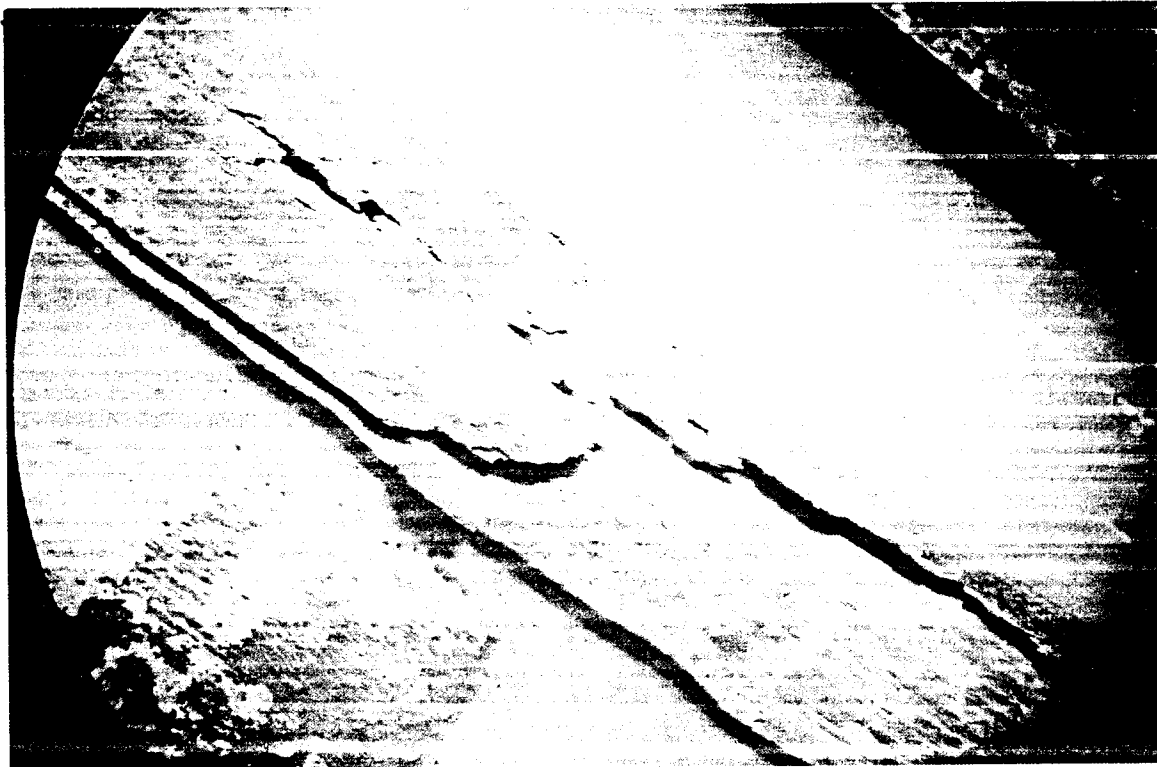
, Corrosion and Deterioration of Boron Strip on Fuel Element #45 Side Plate
